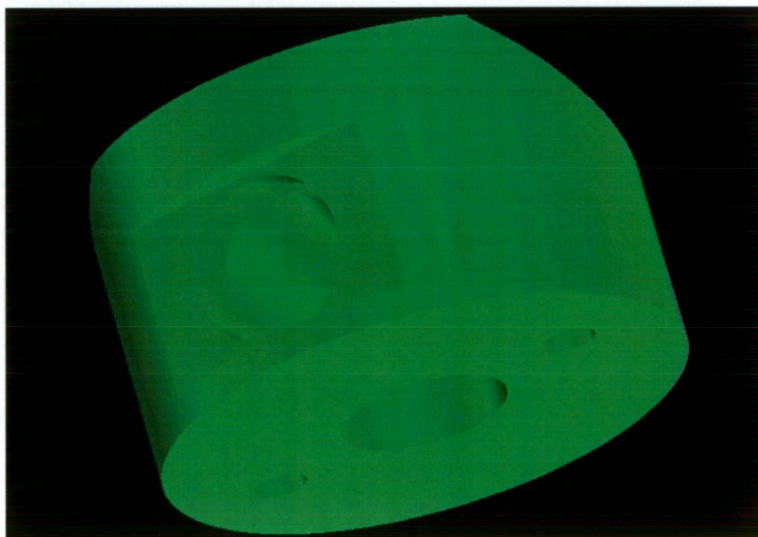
View of air intake and engine intake (underside) on inlet manifold
